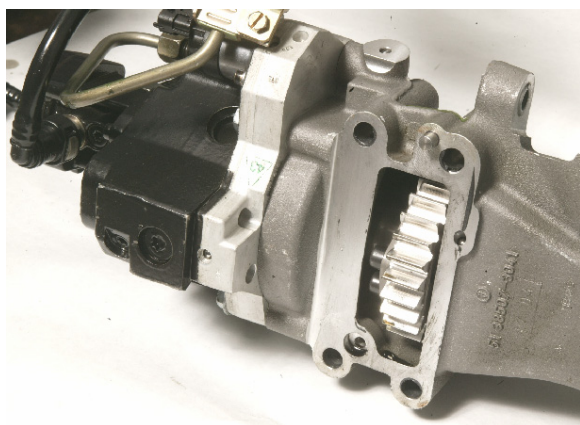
Fuel Pump and Accessory Drive Assembly (bottom view of drive gear)
